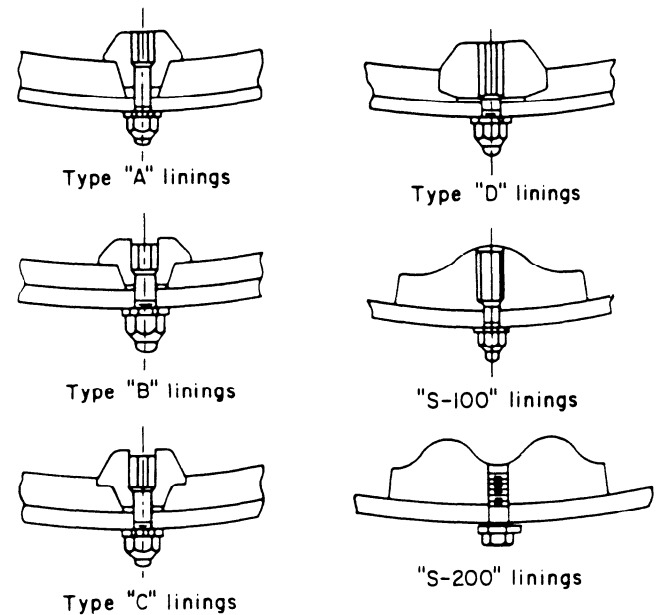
Rolled-steel shell liners, typical cross sections (courtesy: USX Corp.).
